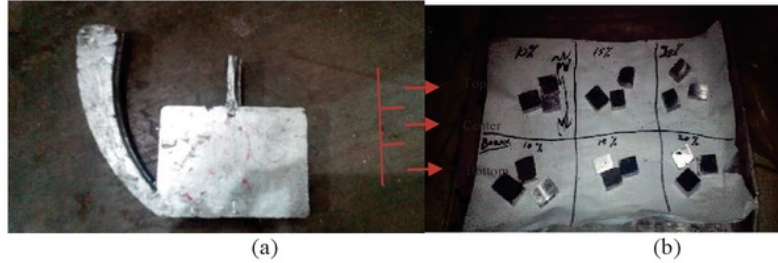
(a), Base specimen casting (b), Specimen of hardness investigated
